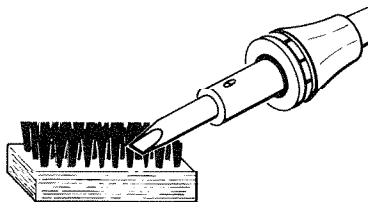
TINNING OF SOLDERING IRON TIP
